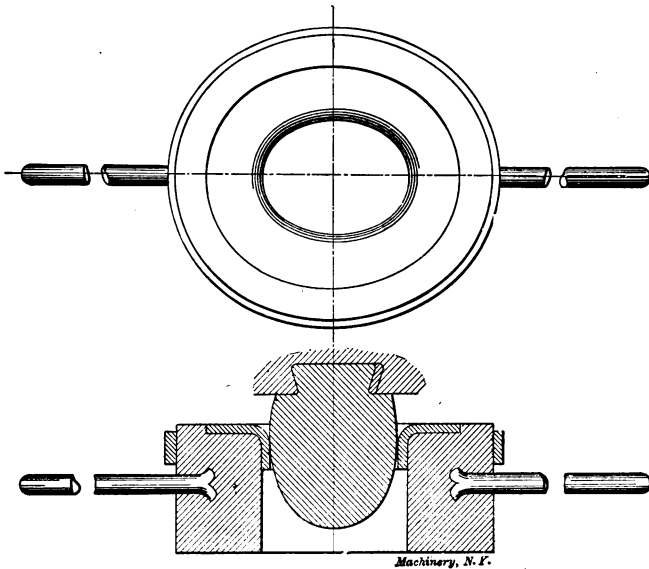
Die Used for Forging and Bending Man-hole Seatings
